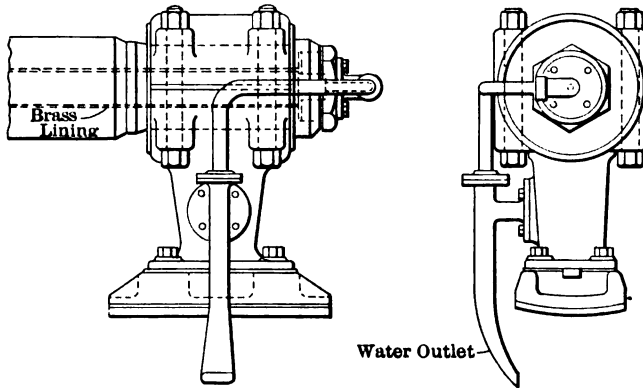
VIEW SHOWING WATER CONNECTION TO TAIL ROD
